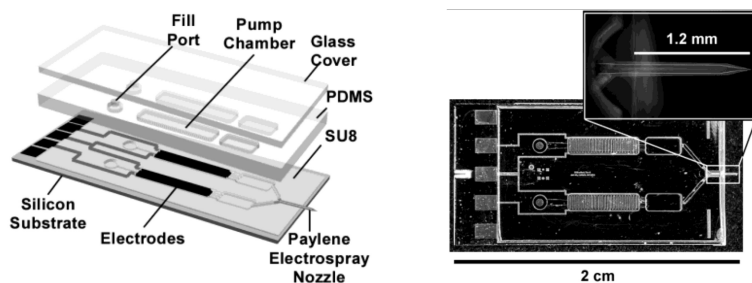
Exploded view (left) and top view (right) of the produced electrochemical dosing chip for electro spray use, by Xie *et al.* [64].
